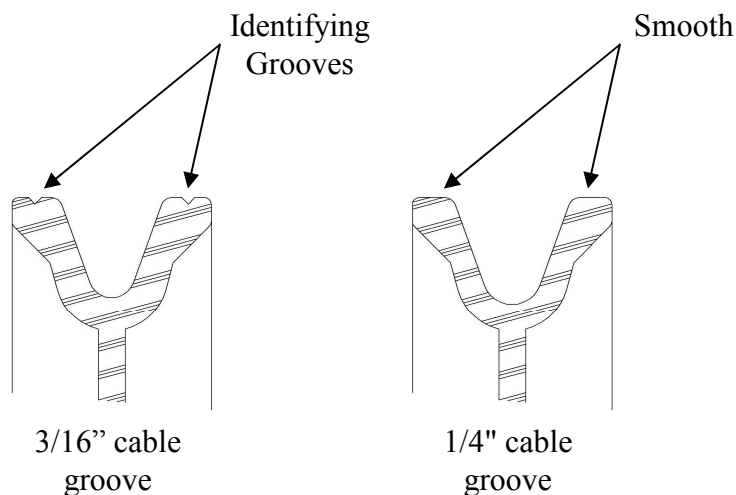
Identifying grooves on JR Clancy 3/16\" groove molded nylon sheaves
